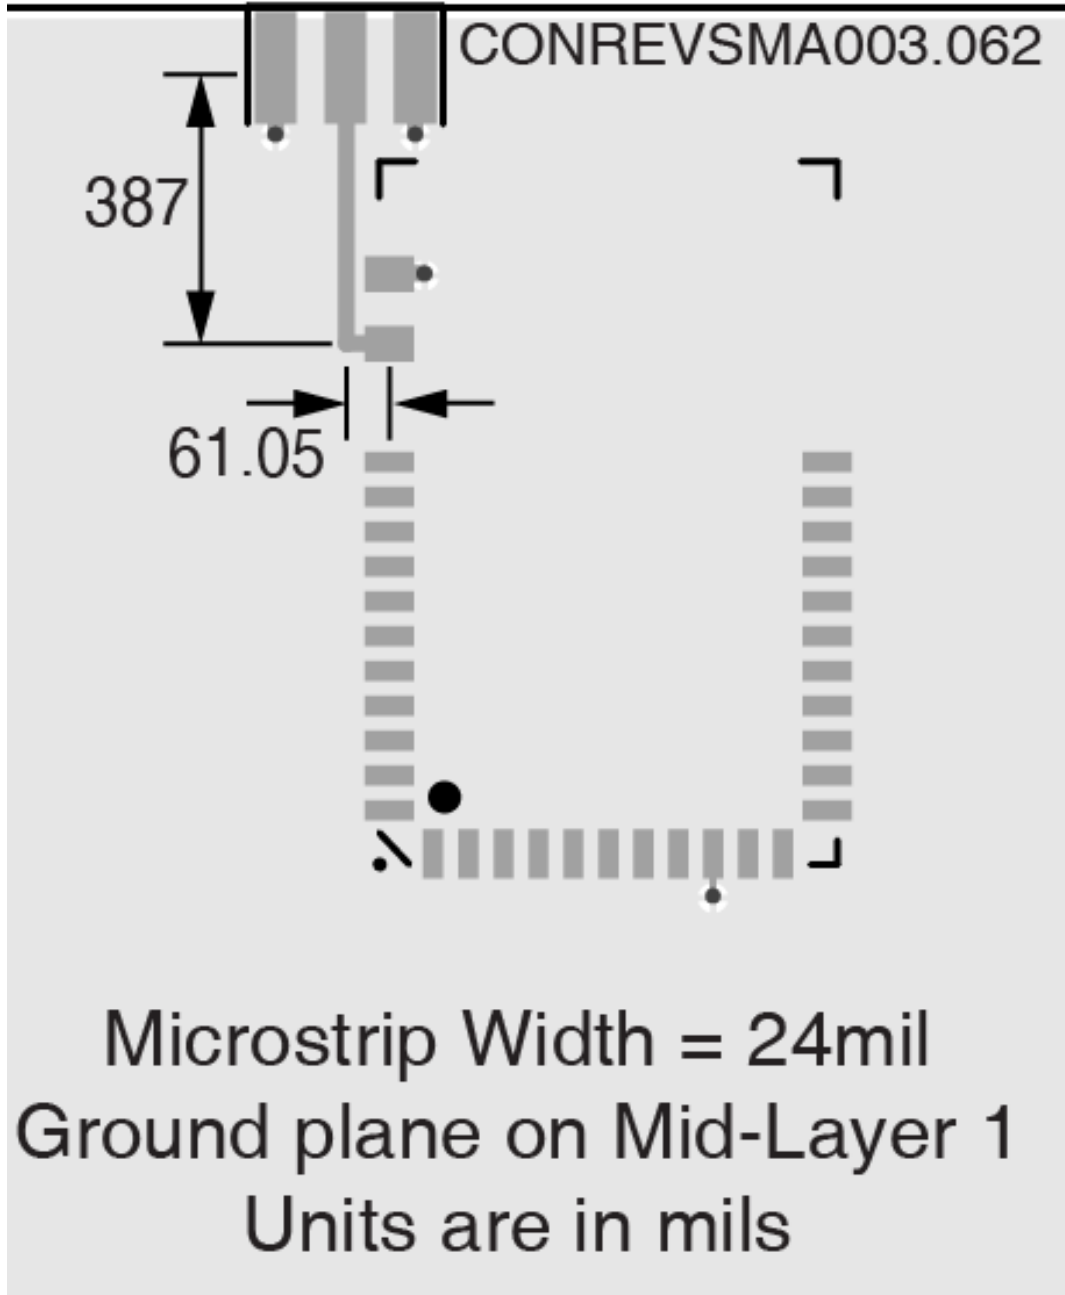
Trace Dimensions for Edge Mount RP-SMA
